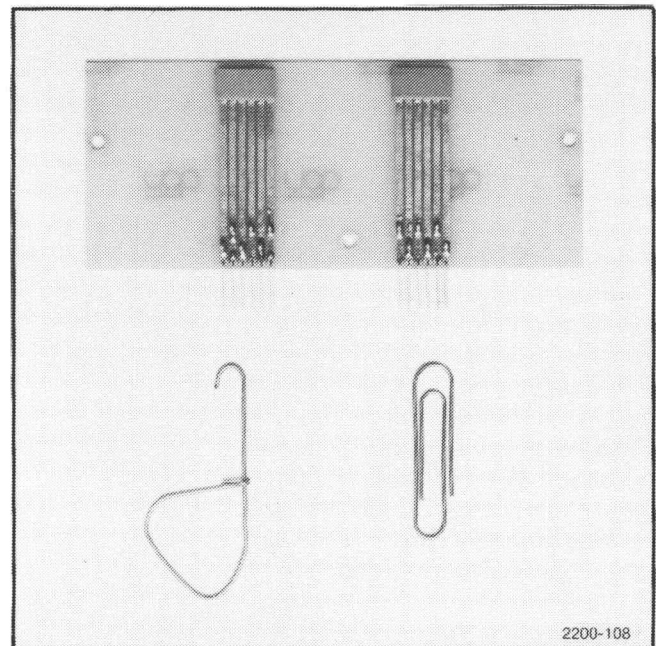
Circuit Board Extracting Tool and Extender Board.
